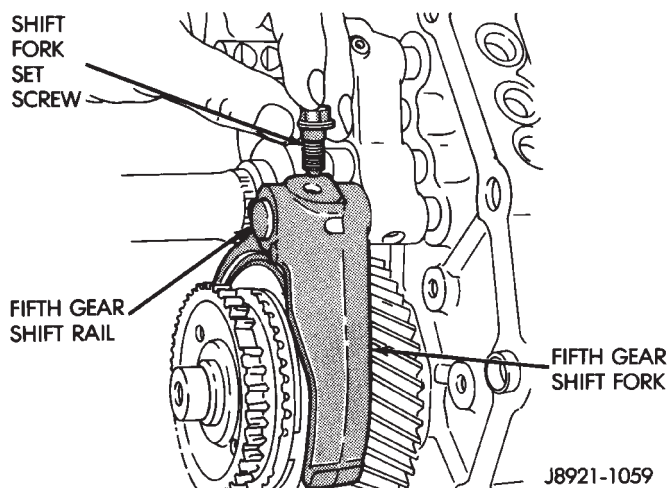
Remove Fifth Gear Shift Fork Retainer Bolt
